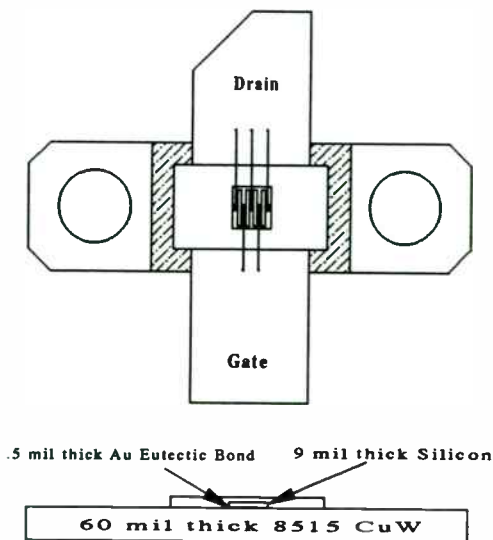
48 V LDMOS Device Mounted in Package, Showing Critical Dimensions
